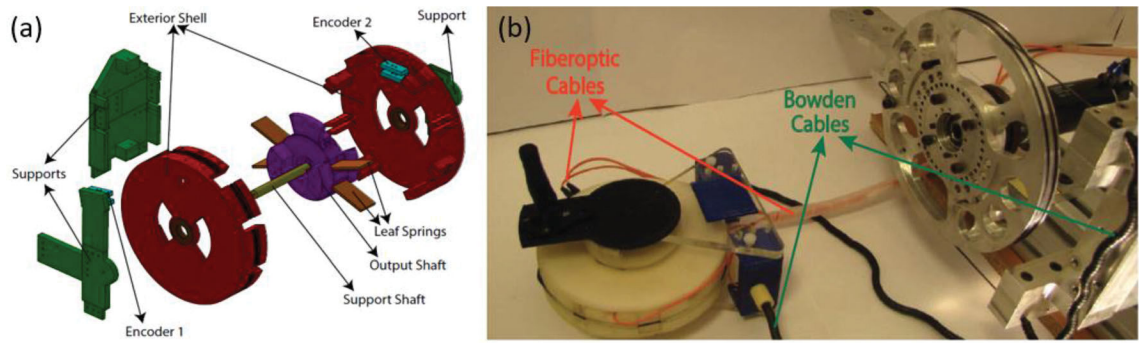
(a) Exploded view of MR-conditional SEA and (b) the robotic system prototype.^{74,98}
